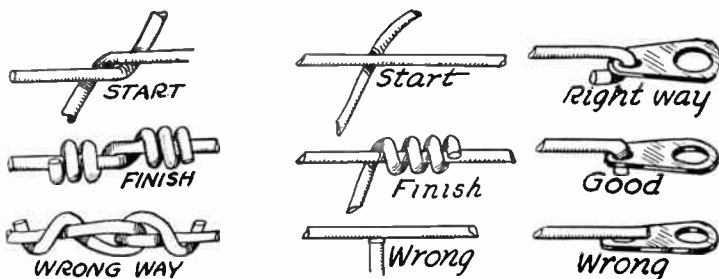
Making Joint Between Two Wire Ends in Soldering.
